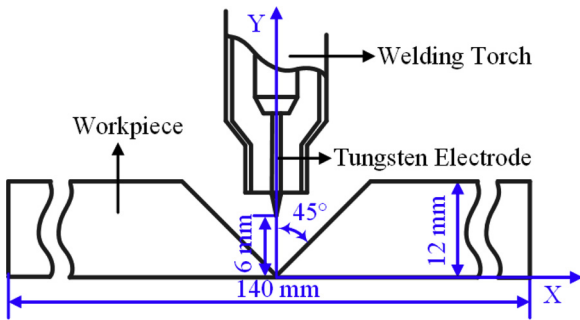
Geometrical cross section of the welded workpiece.
